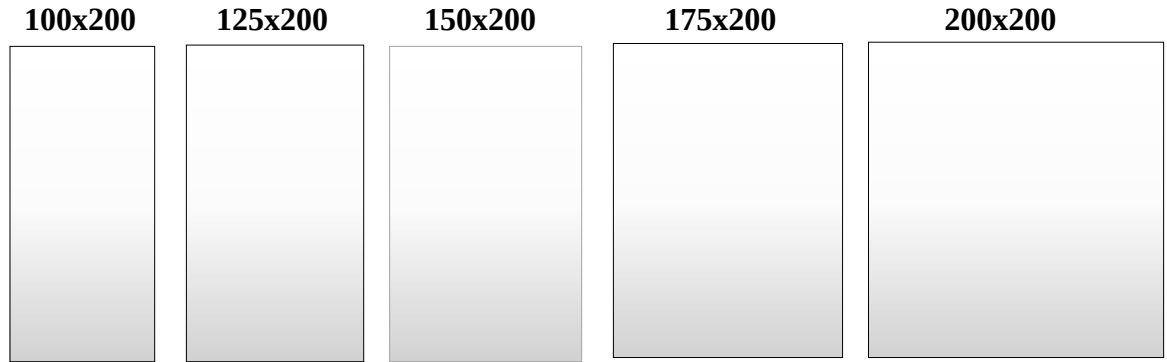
Schematic representation of blanks and their dimensions for LDH tests
